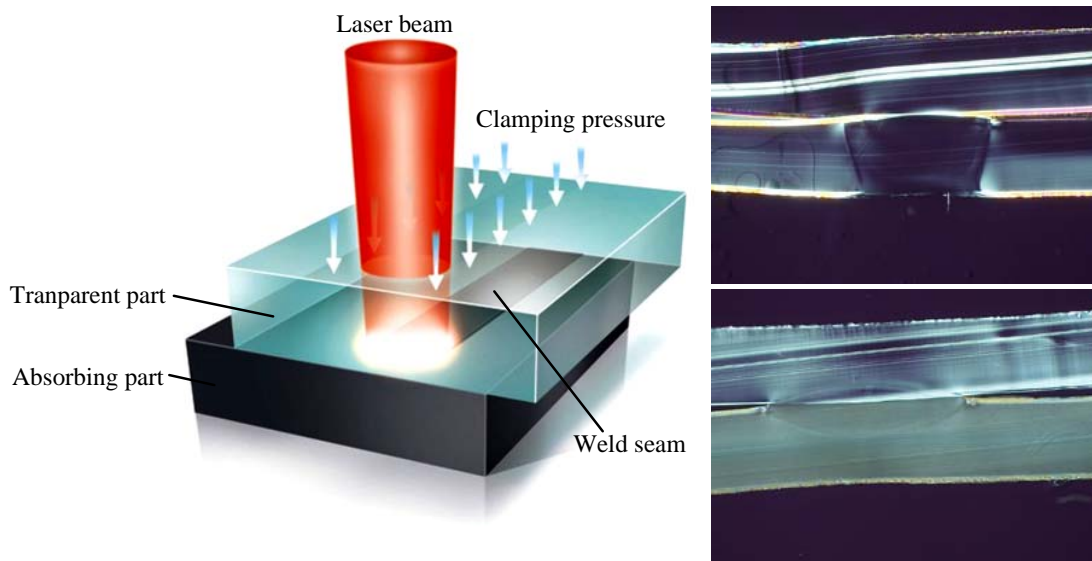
Left: Principle sketch of a transmission laser welded lap-joint. Right: Low quality lap-joint with a clearly visible weld seam (top) and a high quality weld seam (bottom) [lpkf.com, 2012].
